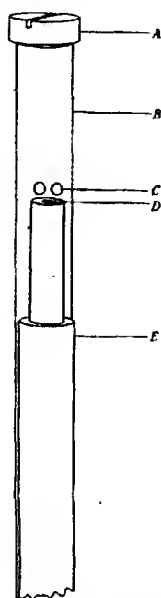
Detail of nozzle: A, screw to allow of cleaning air tube; B, air tube; C, air outlet holes; D, liquid outlet; E, liquid tube.
